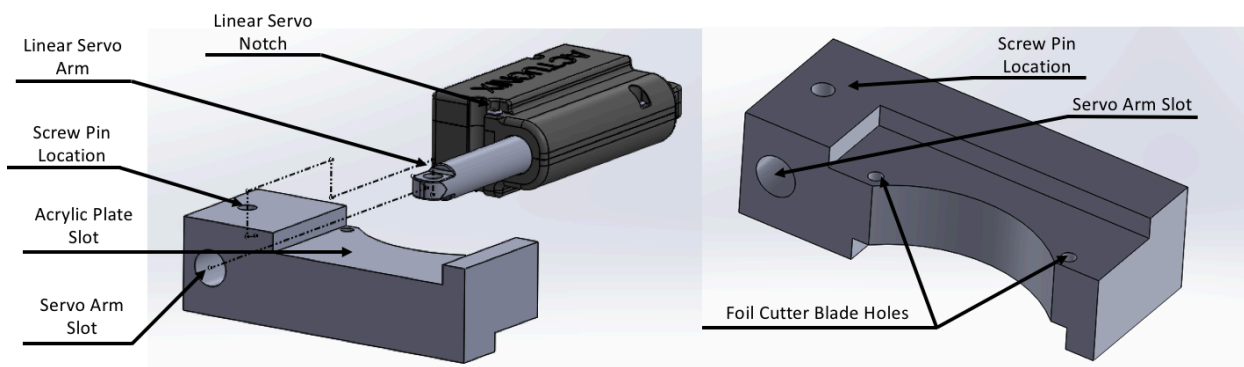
Foil Cutter Bracket and Linear Servo Components
